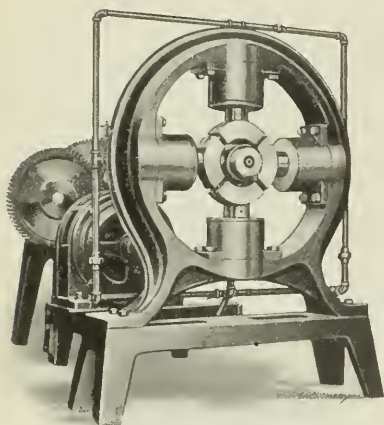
Front View of Southwark Universal Flue Welder, showing Clamping Head
